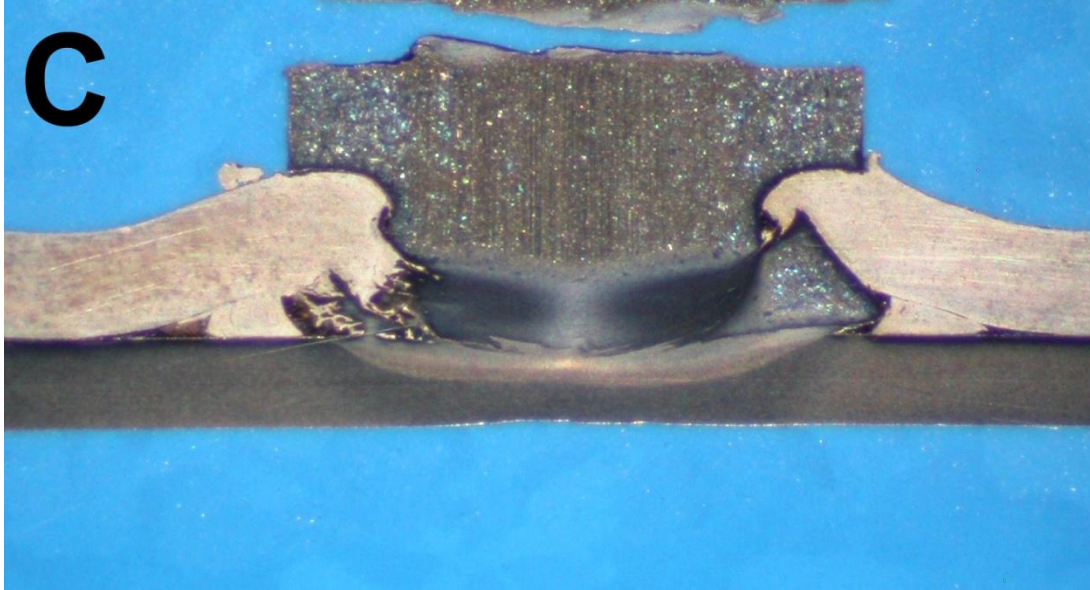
Sample C, nominal welding depth 3.81 mm
